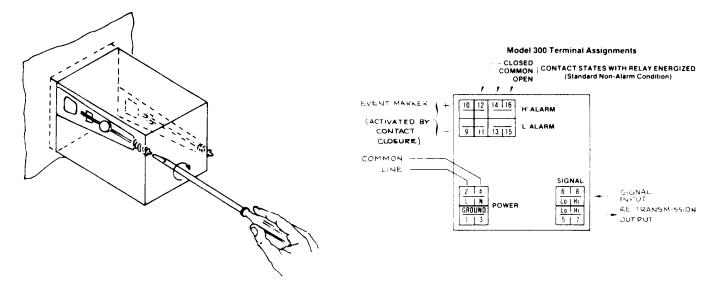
DIN-type jacking clamp Avoid overtightening. The buffer spring should be only slightly compressed: continued rotation of the jacking screw beyond that point could distort the case.
